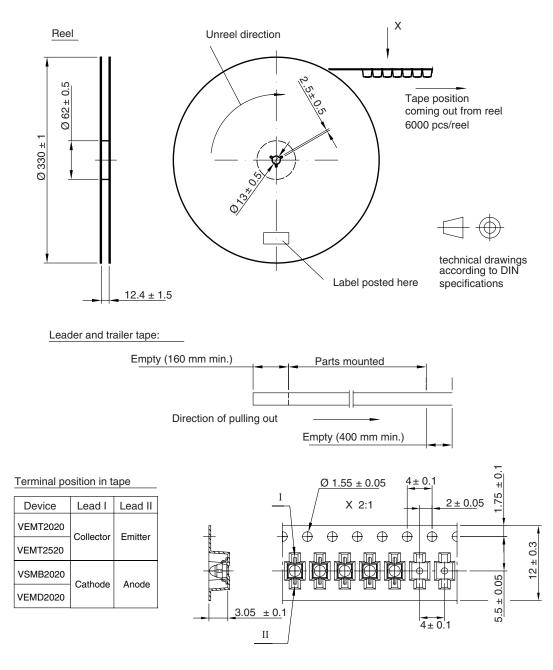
Issue: X; 29.04.09 21572
